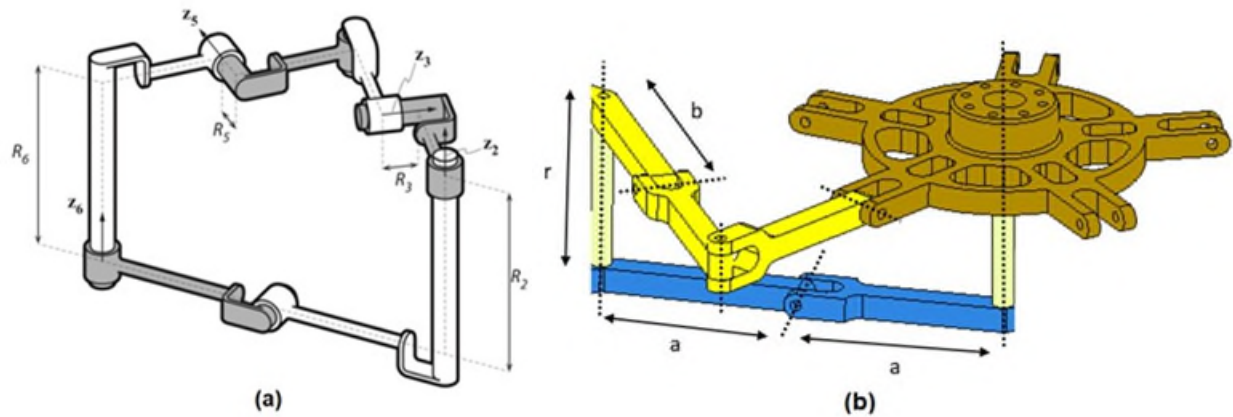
(a) Plane symmetric Bricard Mechanism, (b) Arrangement of Bricard Mechanism for engulfing gripper
